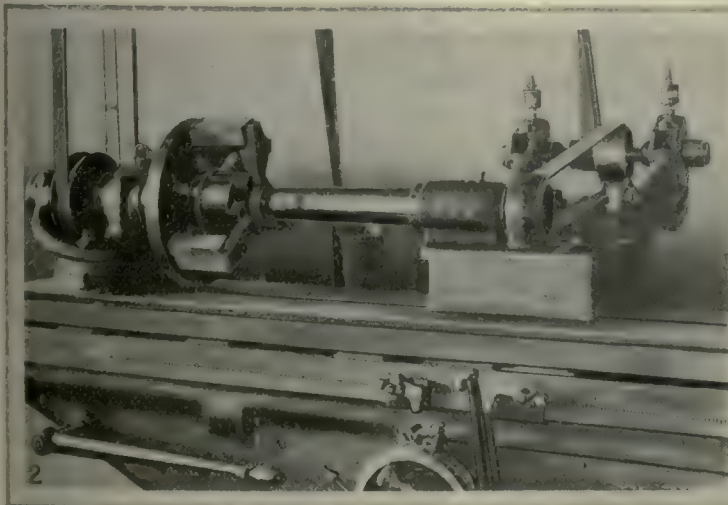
HEALD INTERNAL-GRINDING HEAD ON BROWN & SHARPE GRINDING MACHINE
